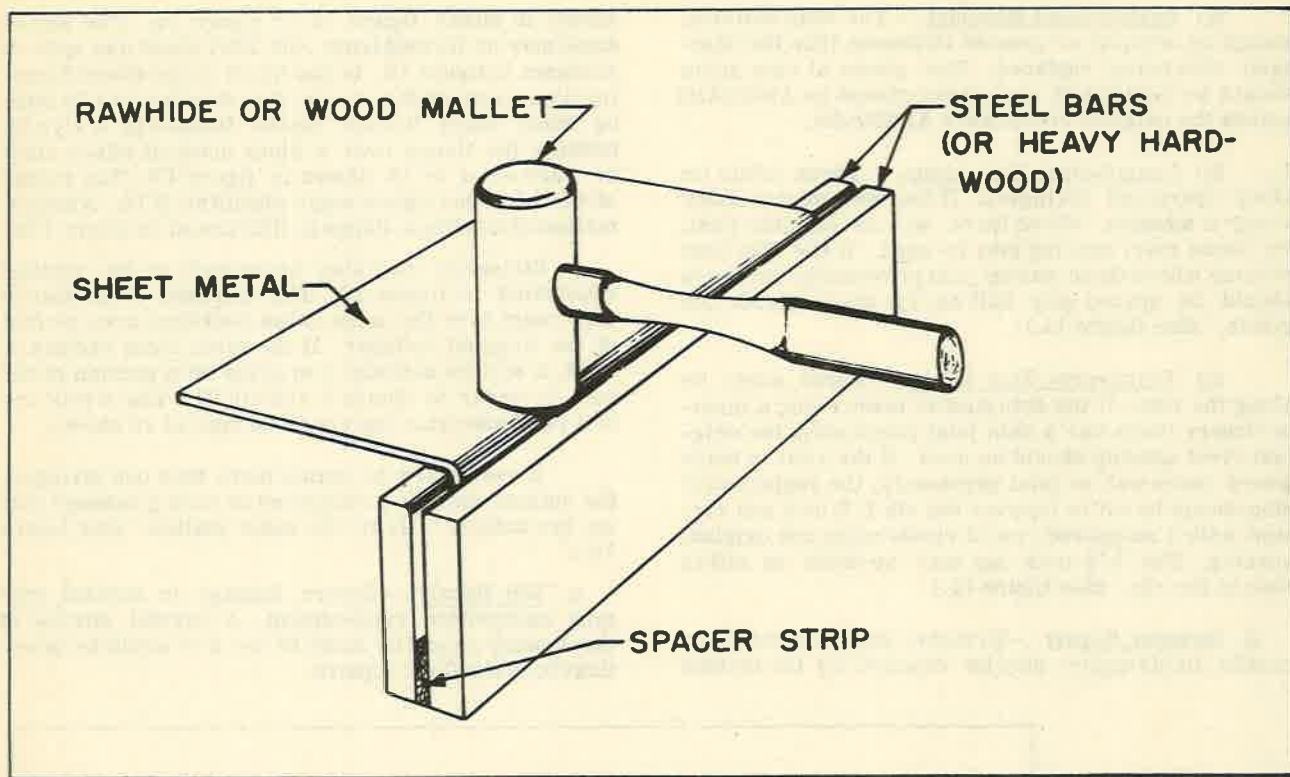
Method of Bending Narrow Flanges and/or Sharp Corners
